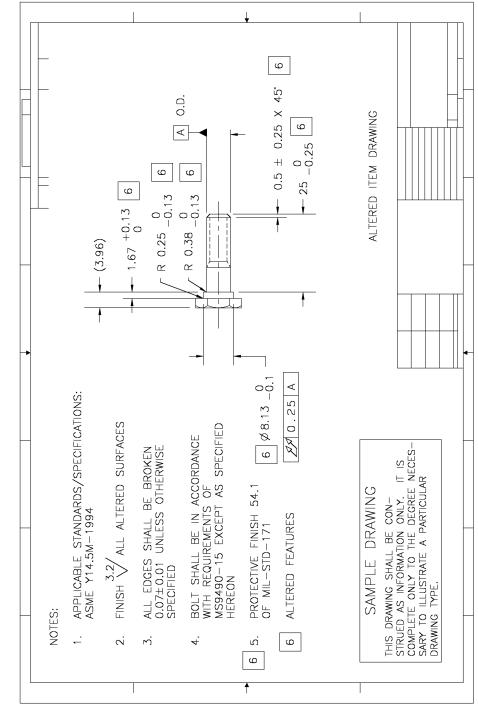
Altered Item Drawing (Mechanical Alteration)
